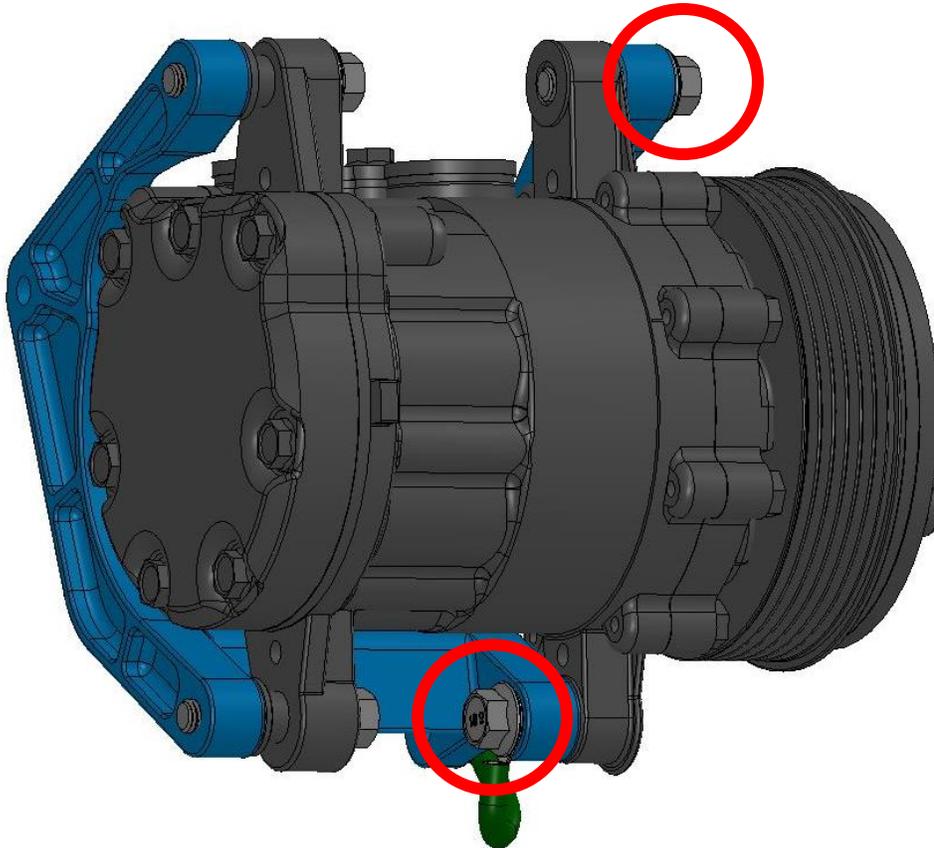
Front upper bolt faces rearward and front lower bolt faces forward. The grounding strap is installed between forward lower mounting ear and flange bolt as shown. Torque all (x4) bolts to 18 ft-lbs.
